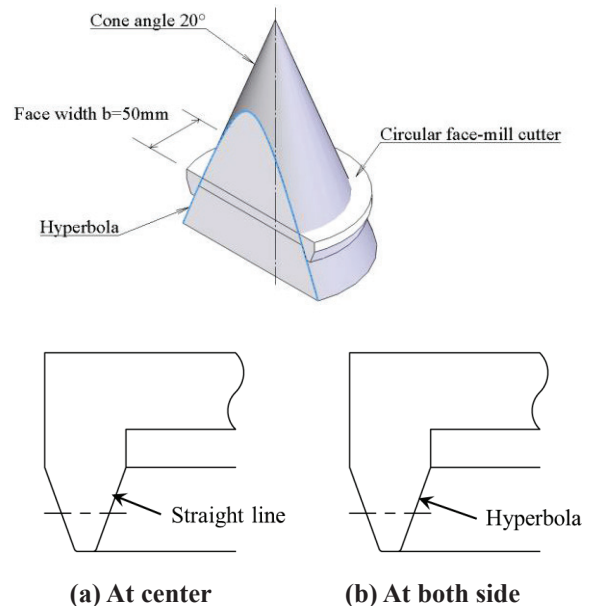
Circular face-mill cutter and tooth profile error on CATT's rack
